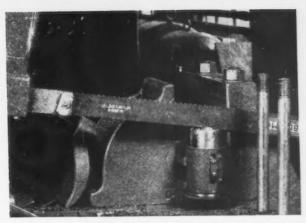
In using the Pressimoeter the saw blade is inverted.
